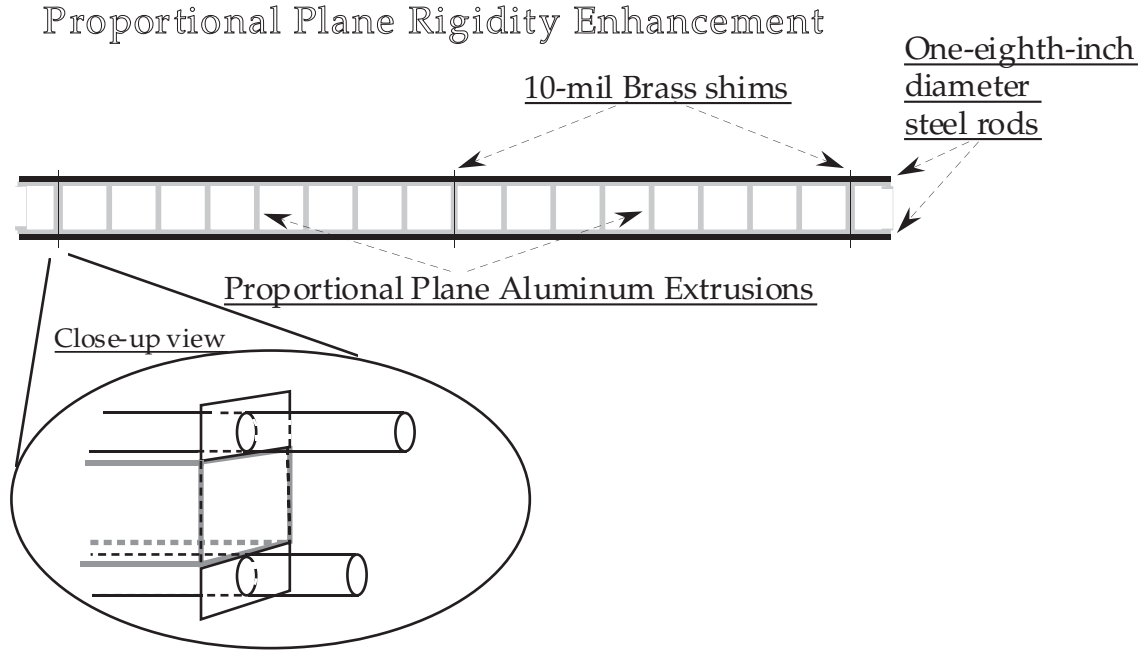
Proportional Plane Construction: Extrusion Clamping system
